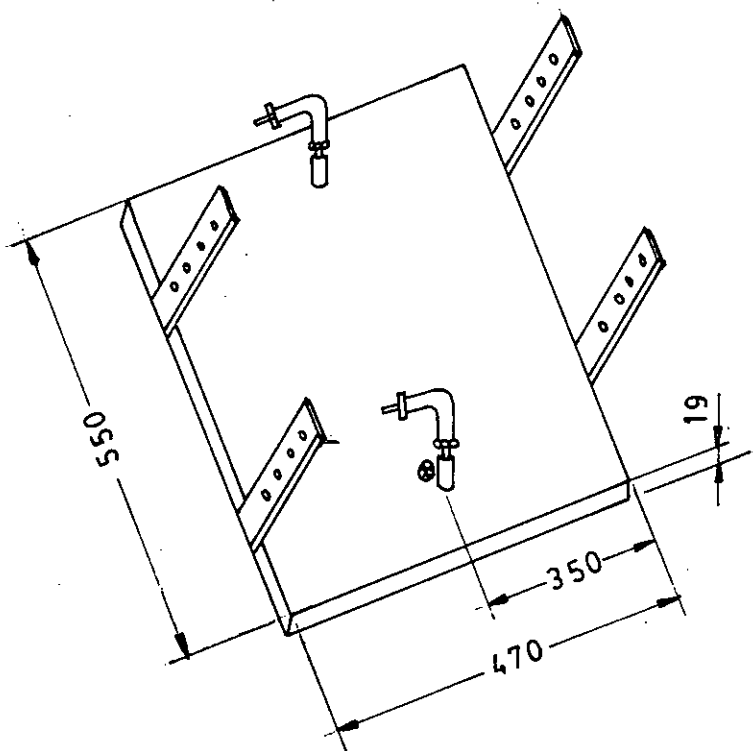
DETAILS OF THE COLD PLATE ASSEMBLY
